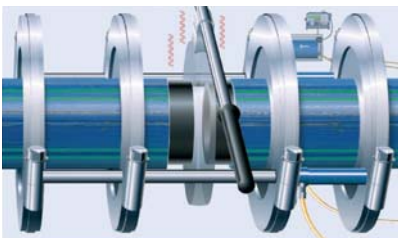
Welding in accordance with DVS 2207, Part 1
